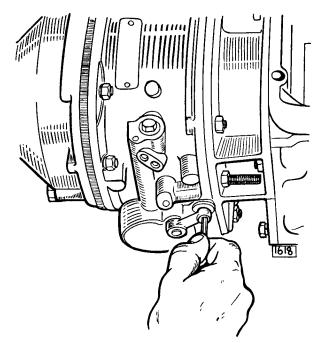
Aligning the hole in the valve setting lever with the corresponding hole in the housing.
